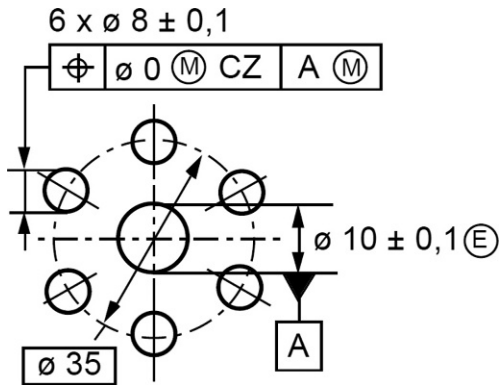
Pattern of holes related to a datum hole with \textcircled{M} , CZ indicated
